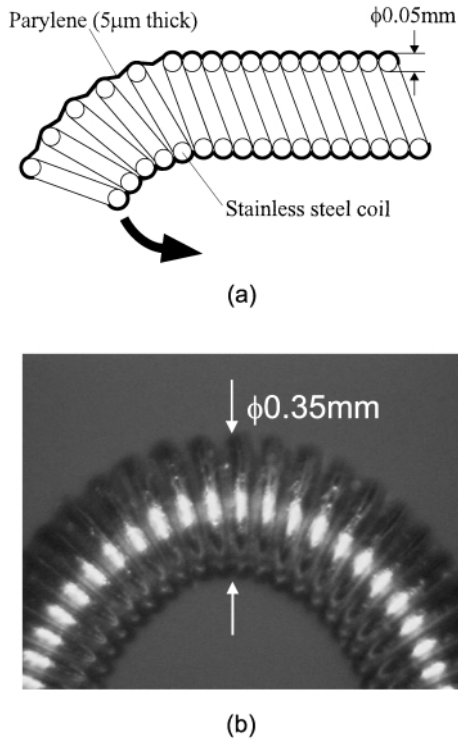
Coil spring with coated parylene on outer side. (a) Structure; (b) photograph.
